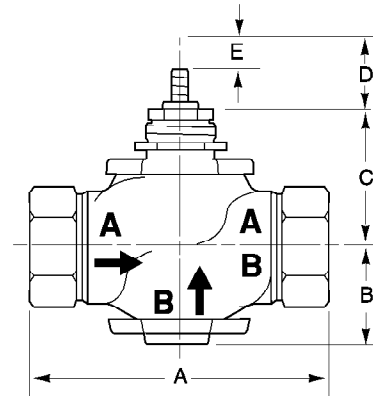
Typical of VB-7225-0-4-P Valve Bodies.
